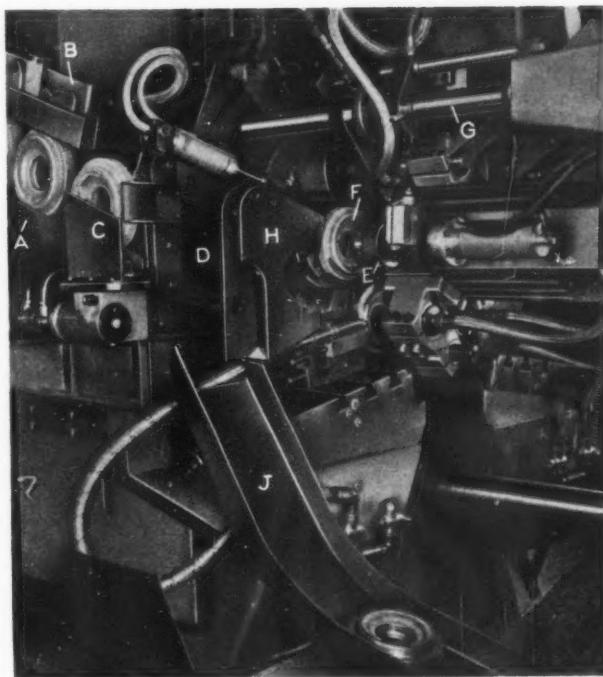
Close-up View of a Wickman 7½-in. Capacity, 6-spindle Chucking Automatic Fitted with Automatic Loading and Unloading Equipment
